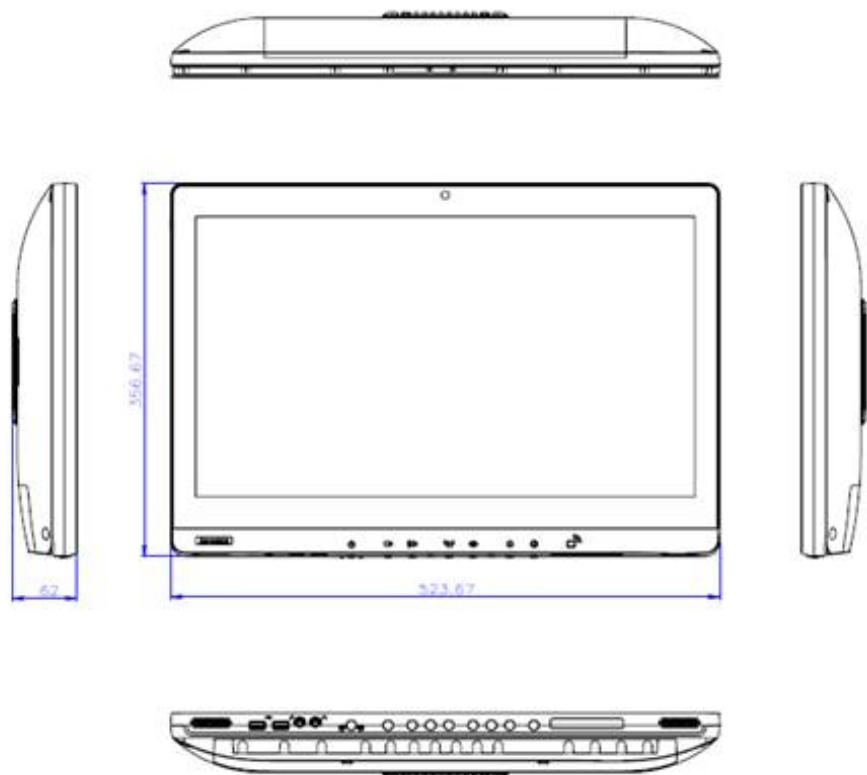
POC-621 with RFID & Camera Accessory Dimensions
